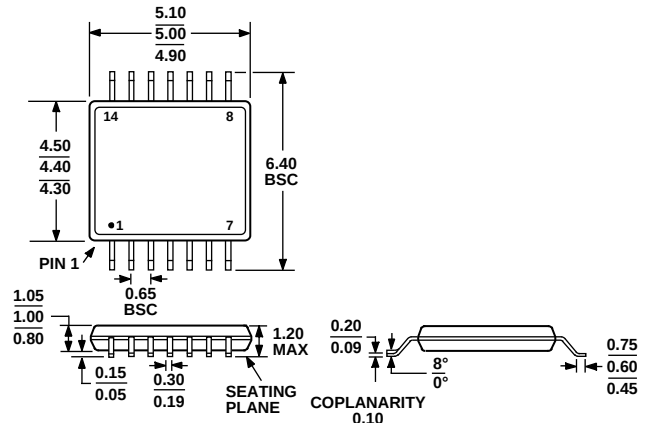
14-Lead Thin Shrink Small Outline Package [TSSOP]
